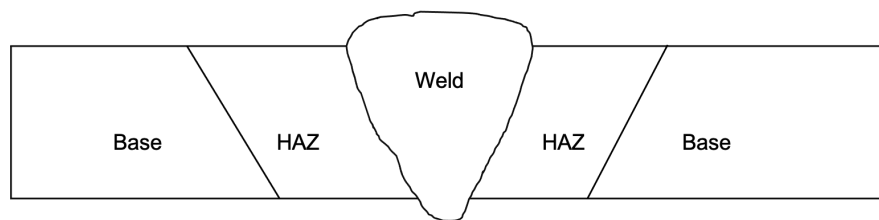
Cross sectional view of a butt weld with HAZ labeled
